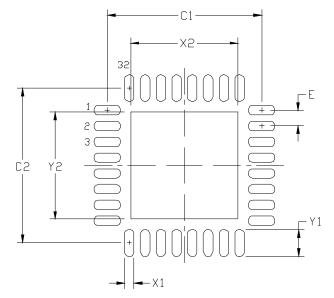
QFN-32 Recommended PCB Land Pattern
